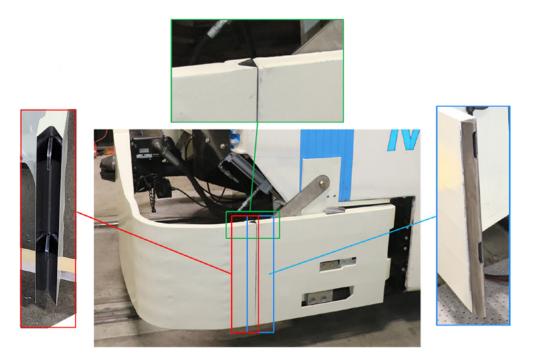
Side Panel and Front Enclosure Geometric Interface
